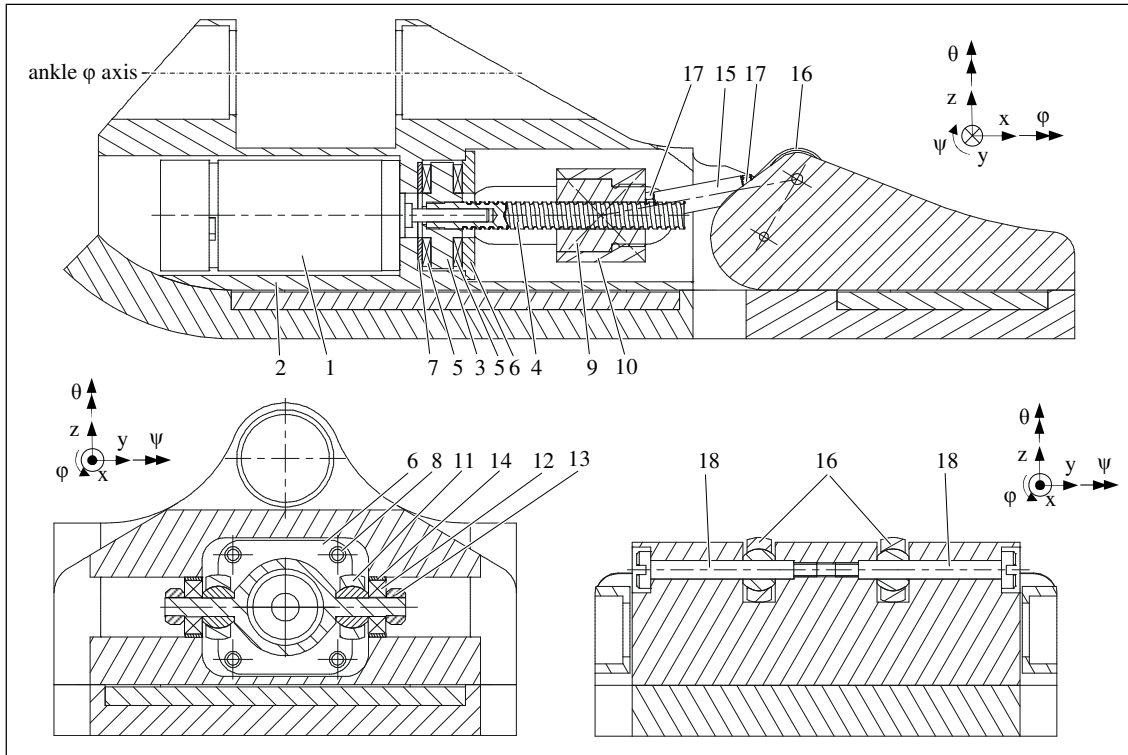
Toe section view in  $xz$  plane (above),  $yz$  plane section view through center of the ball screw nut (below left) and  $yz$  plane section view through the center of the eccentric holes of the toe (below right): DC motor (1), base-foot (2), flange (3), ball screw spindle (4), axial needle roller bearings (5), cover (6), axial bearing washer (7), M3 bolts (8), ball screw nut (9), nut holder (10), rod end (11), single row yoke type track rollers (12), M3 hexagon nut (13), track roller strip (14), push pull rod (15), rod ends (16), M3 nuts (17) and fitting bolts (18).
